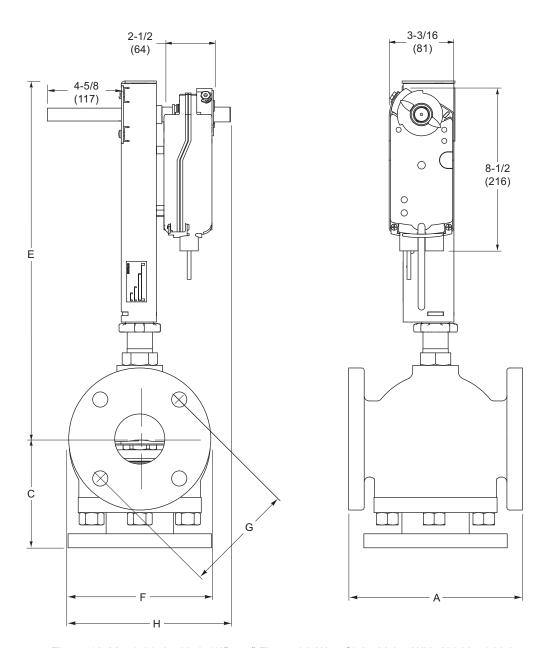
Mx41-6153 with 2-1/2" to 4" Flanged 3-Way Globe Valve With AV-607-1 Linkage.
